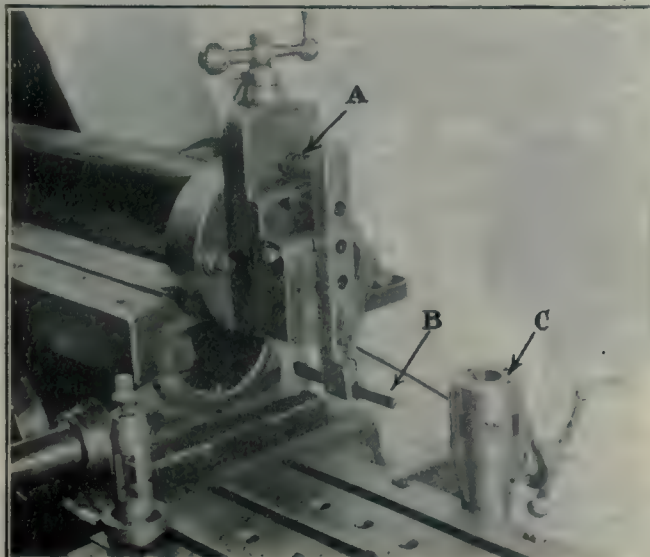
CLAMPING DEVICE FOR OUTER ENDS OF SHAFTS.
